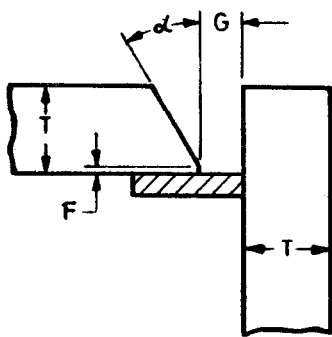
TILTING OF FILLET WELD AND T JOINTS
